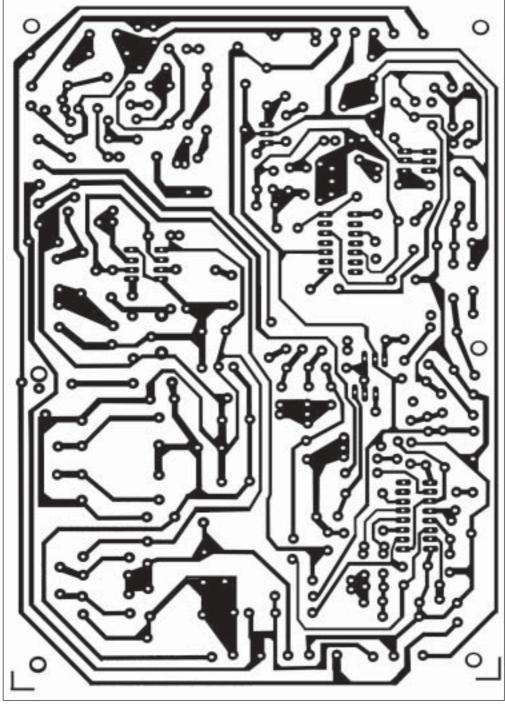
PCB layout for the circuits in Figs 4 and 5 (track-side)
